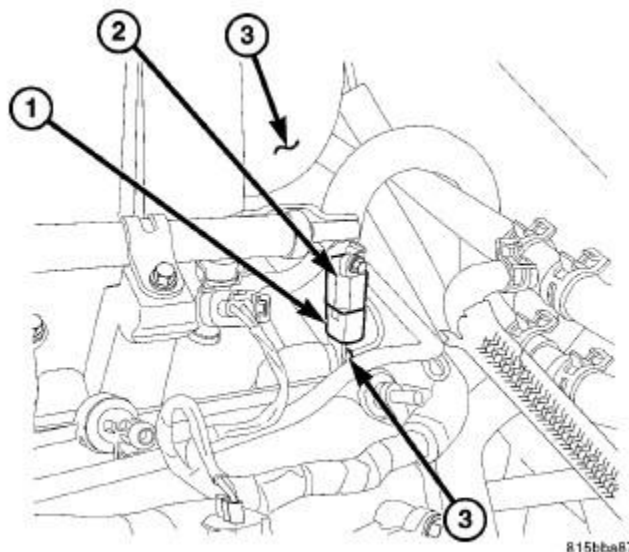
Ignition Capacitors, Intake Manifold & Harness Connector
